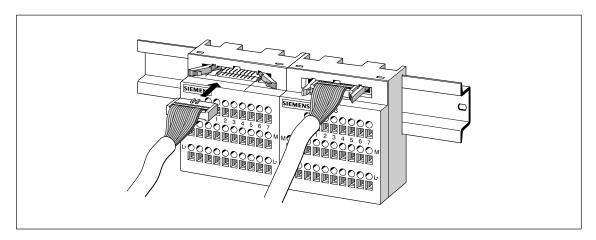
Plugging the Connecting Cable into the Terminal Block
